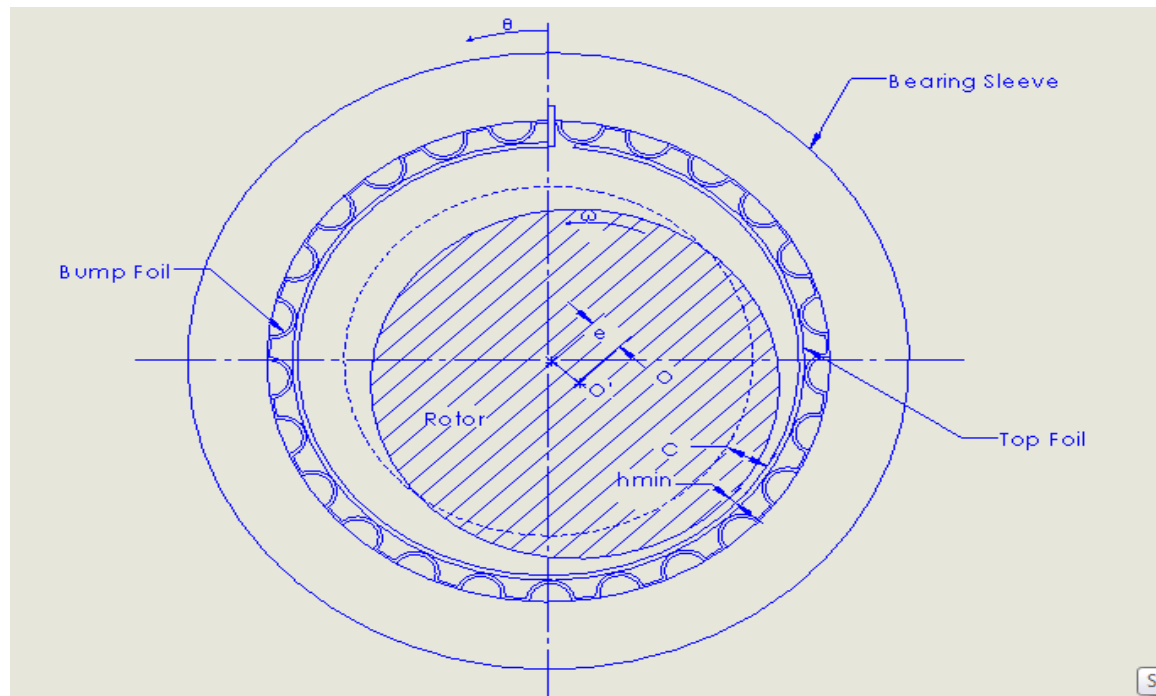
Schematic of a circular top foil, continuous bump air foil bearing showing eccentricity and radial clearance
